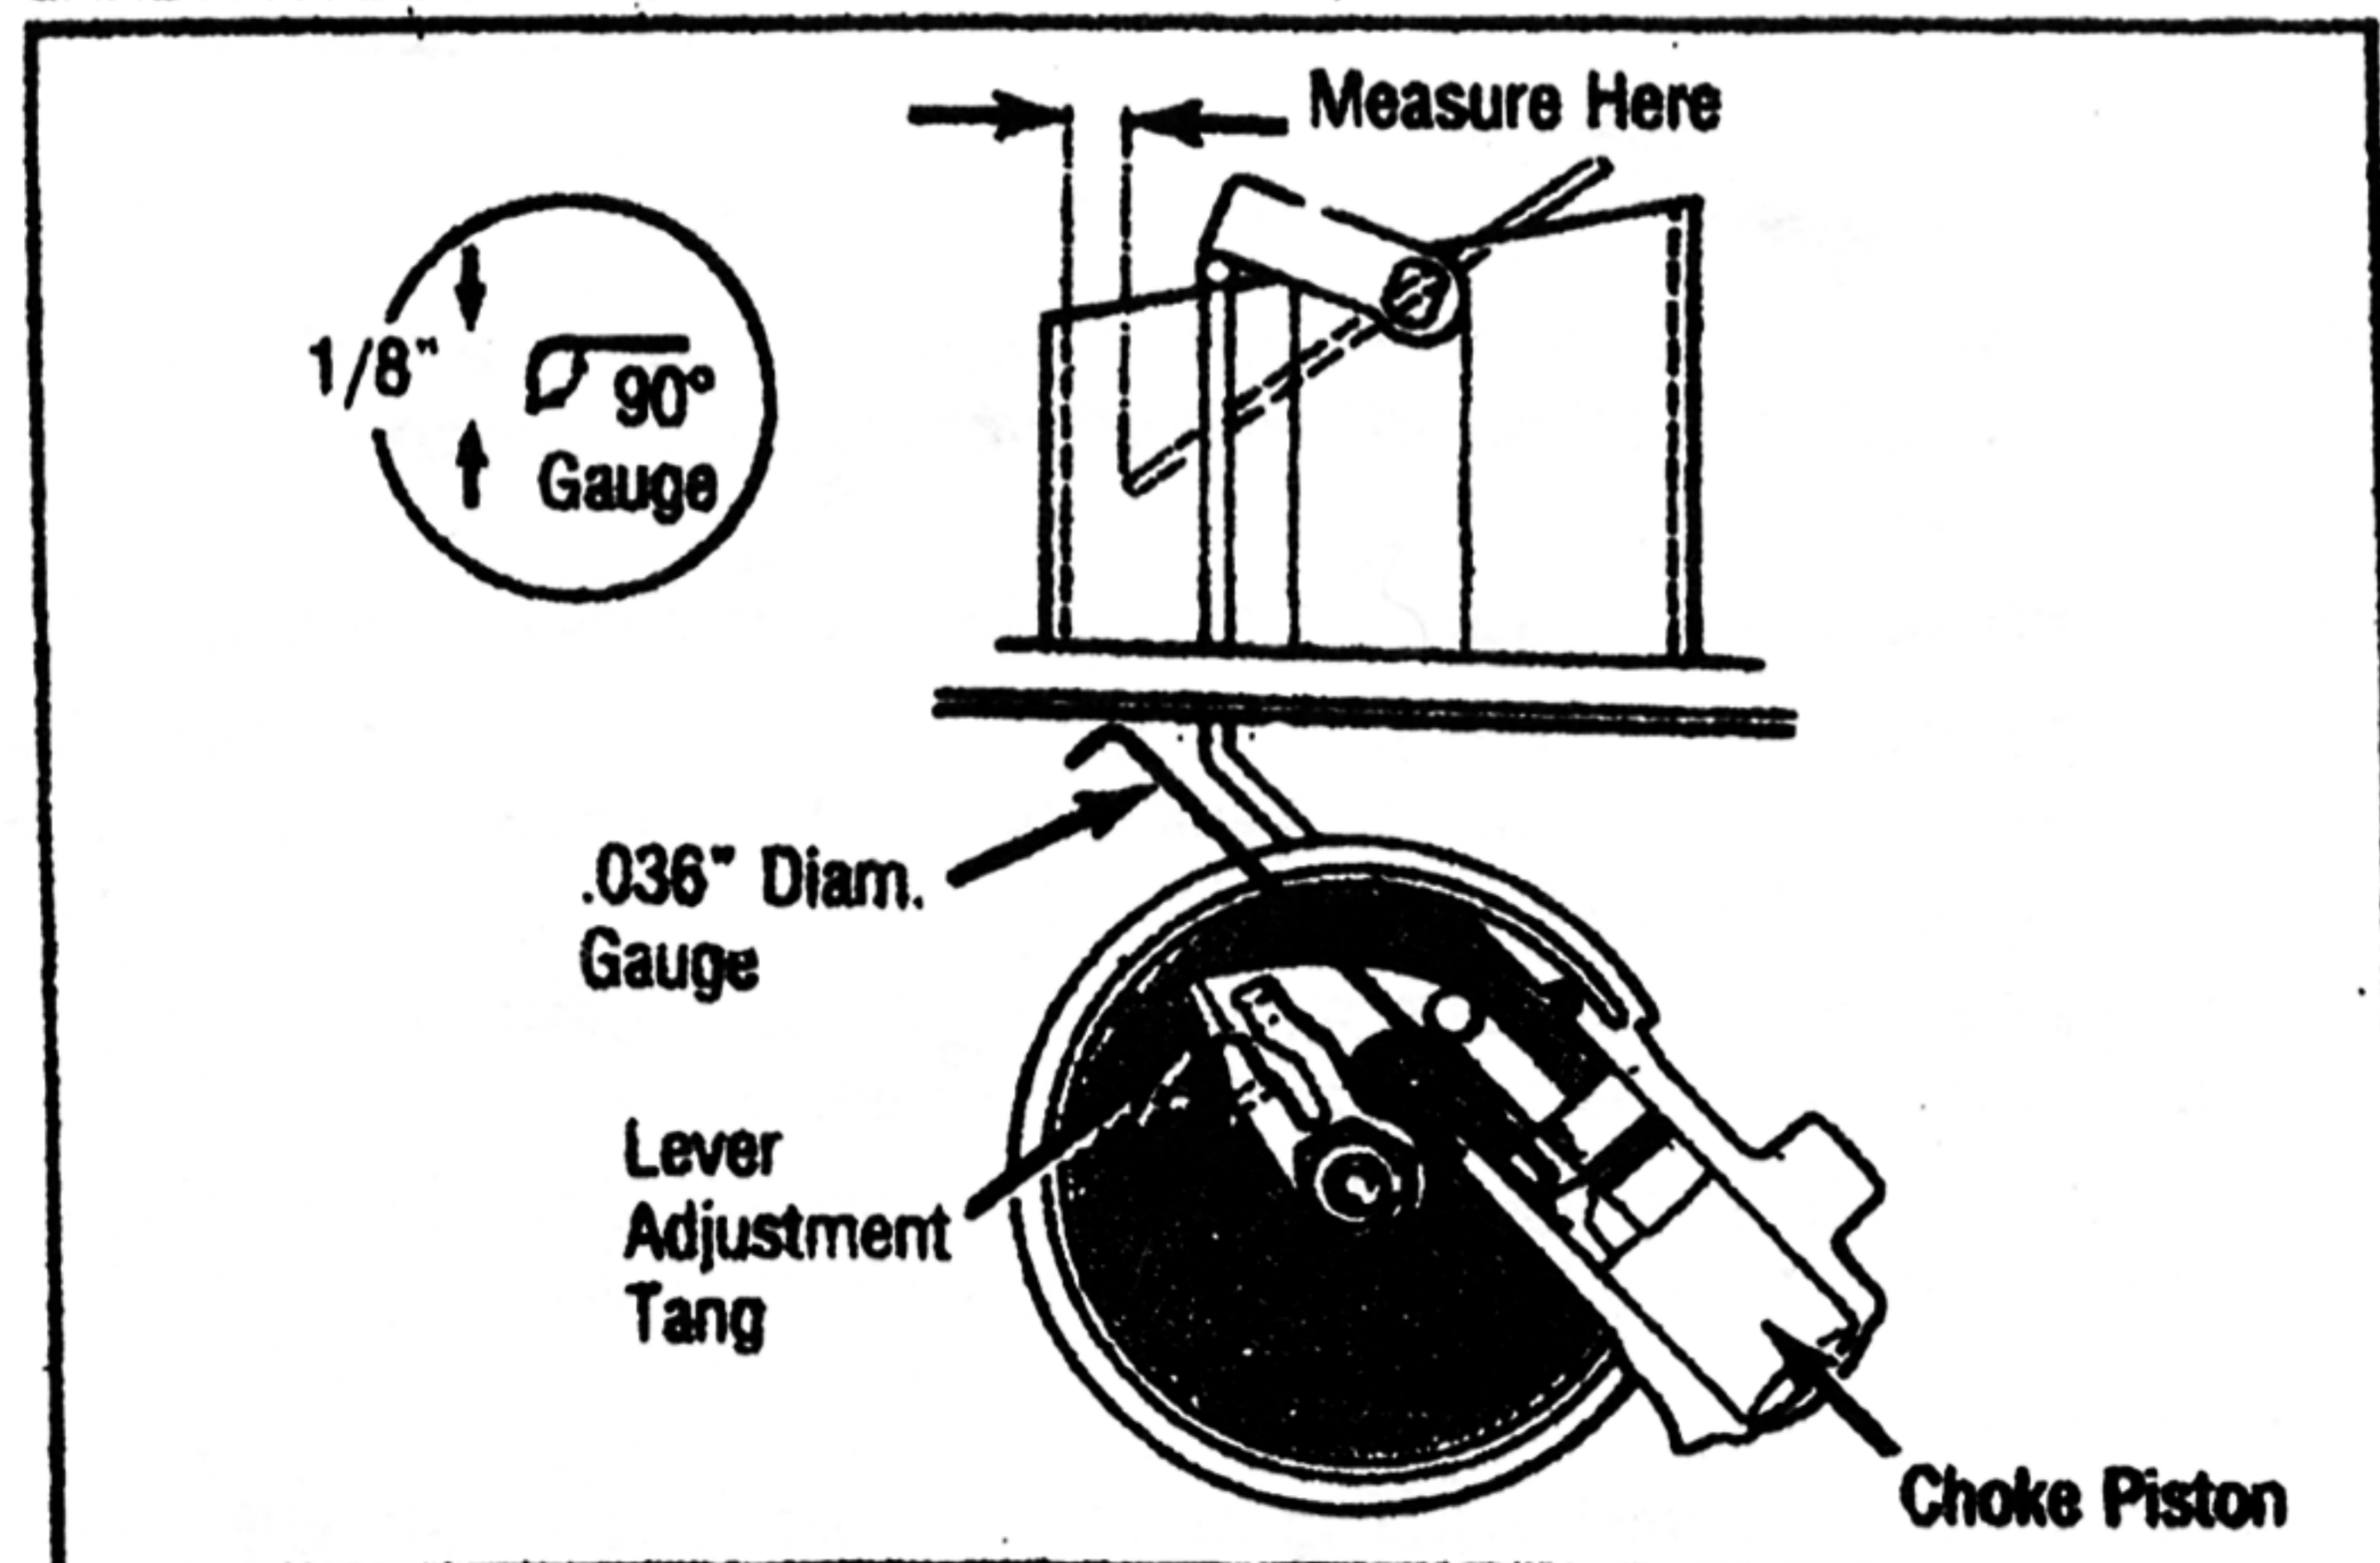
Choke Pull Down Adjustment (Early Integral Piston Type)
